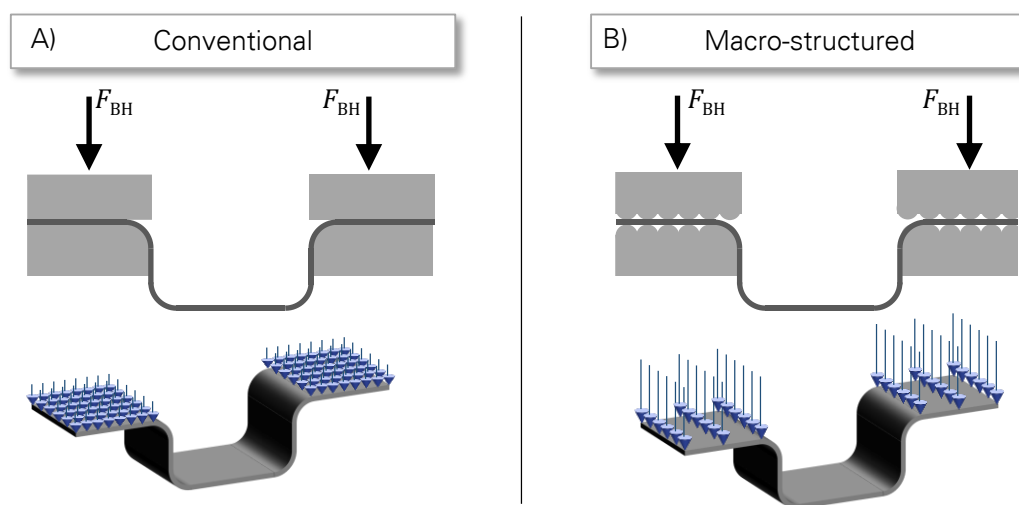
Surface pressure in A) conventional and B) macro-structured deep drawing tool
